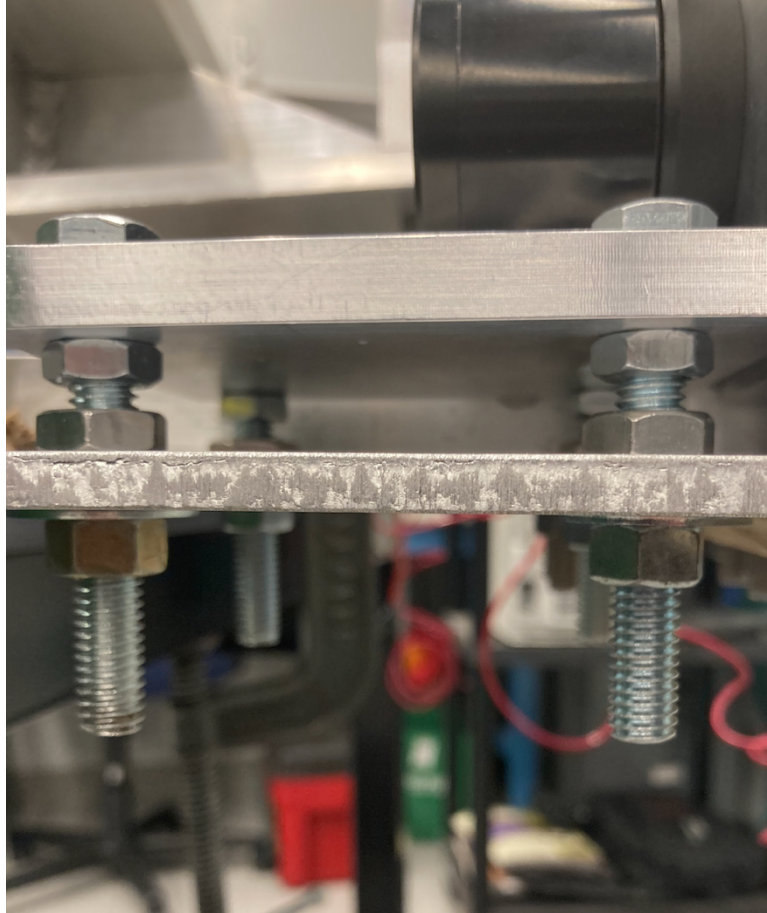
The nuts between the motor mount and platform allowed for tension adjustment of the belt.
